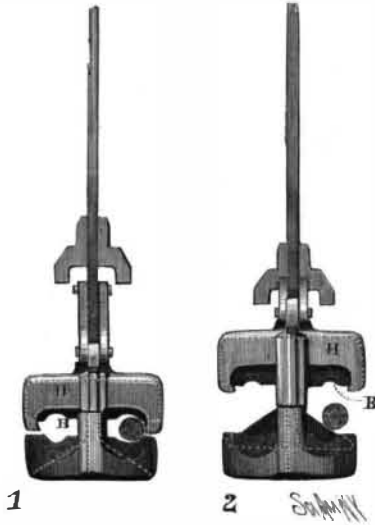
Cable released. FIG. 2.—"Tripping" the cable, but held in place by hooks.
